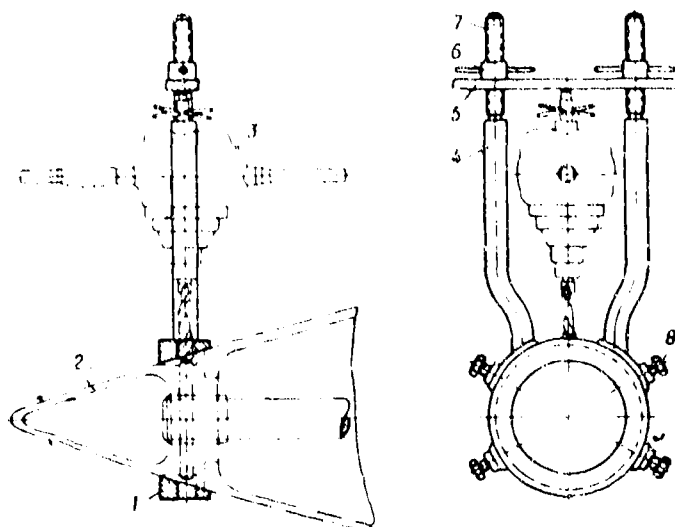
Device for Drilling Out the Stops and Pins in the Screw Propeller's Fairing: 1 - frame; 2 - fairing; 3 - drill; 4 - guide blocks; 5 - pressure cleat (strip); 6 - pressure nuts; 7 - pins; and 8 - centering bolts.
